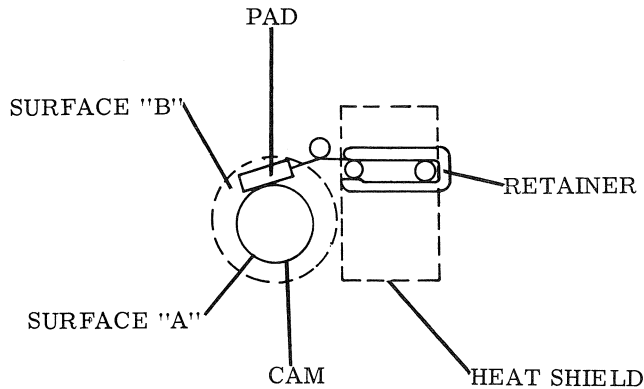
LUBRICATOR PAD ASSEMBLY
